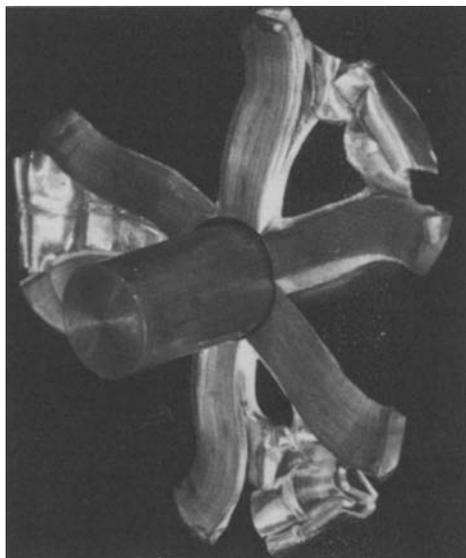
Multilayer copper-aluminum tube produced by cold pressure draw welding
